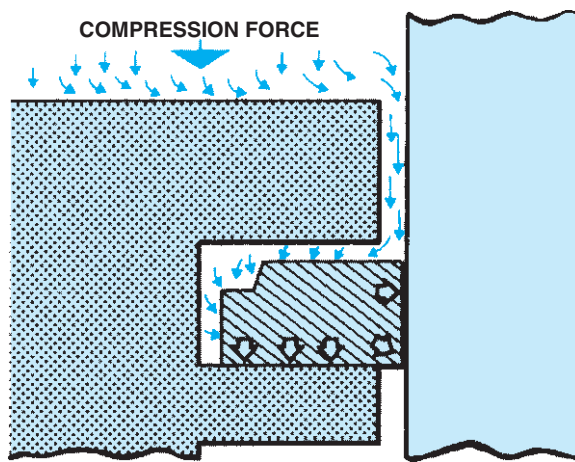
Combustion chamber pressure forces the ring against the cylinder wall and the bottom of the ring groove, effectively sealing the cylinder.
